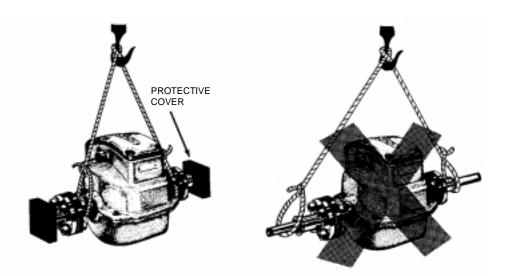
Lifting Sanitary Flowtube for Horizontal Mounting
